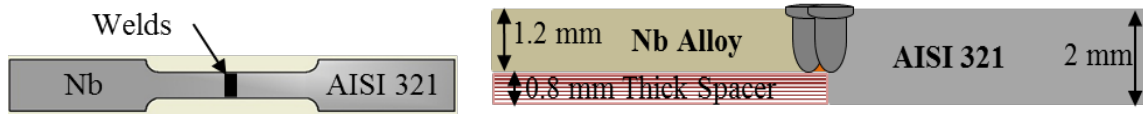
Tensile Specimen of weld sample (Top view, Front View)
